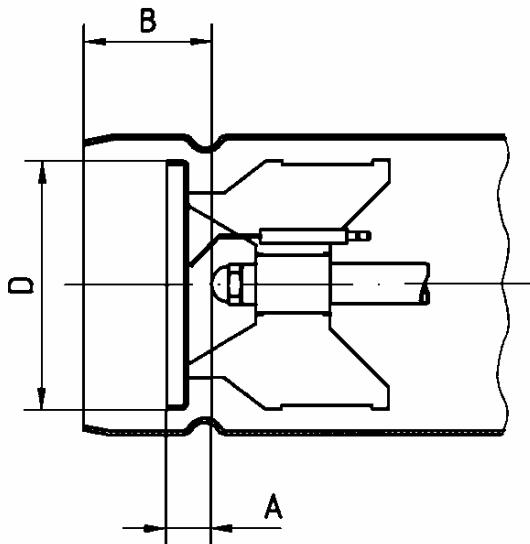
Adjustment dimensions DZ 2.1, DZ 2.2 und DZ 3.0
